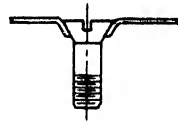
Extruded hole for a countersunk screw or rivet head.
